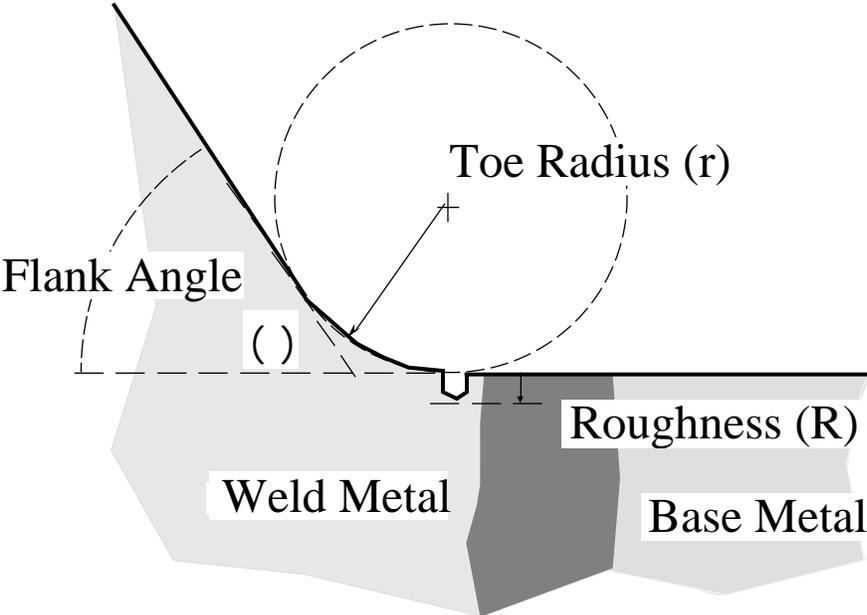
Idealization of thermite weld toe geometry.
